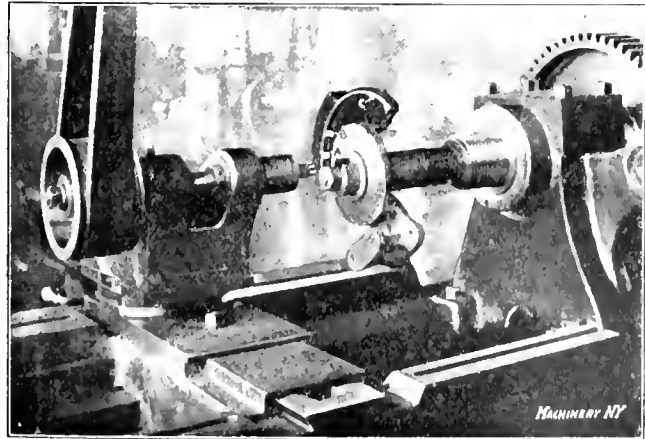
Milling Contact Spots on Counter-shaft Friction Parts
